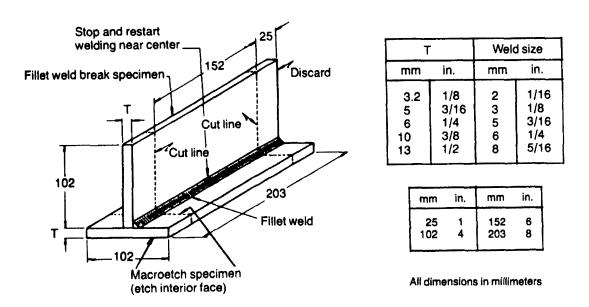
C—Fillet weld break and macroetch test plate—welder qualification
